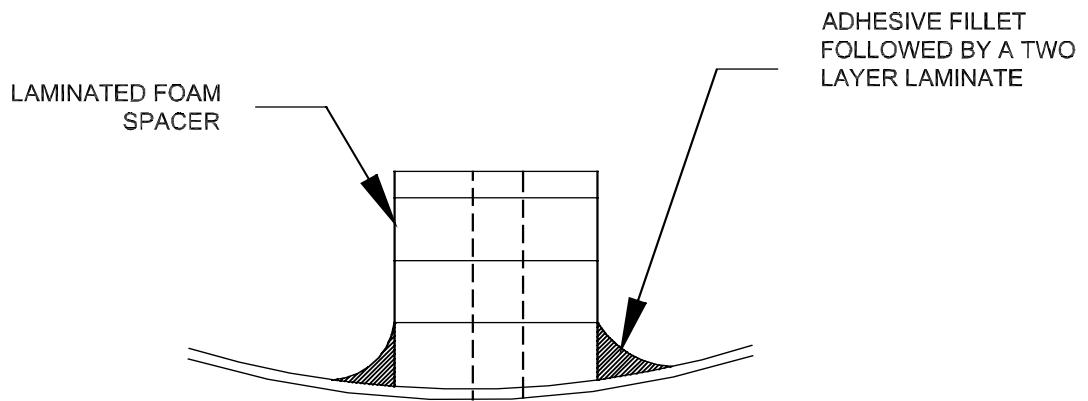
Bonding the Laminated Spacers to the Wheel Pant
